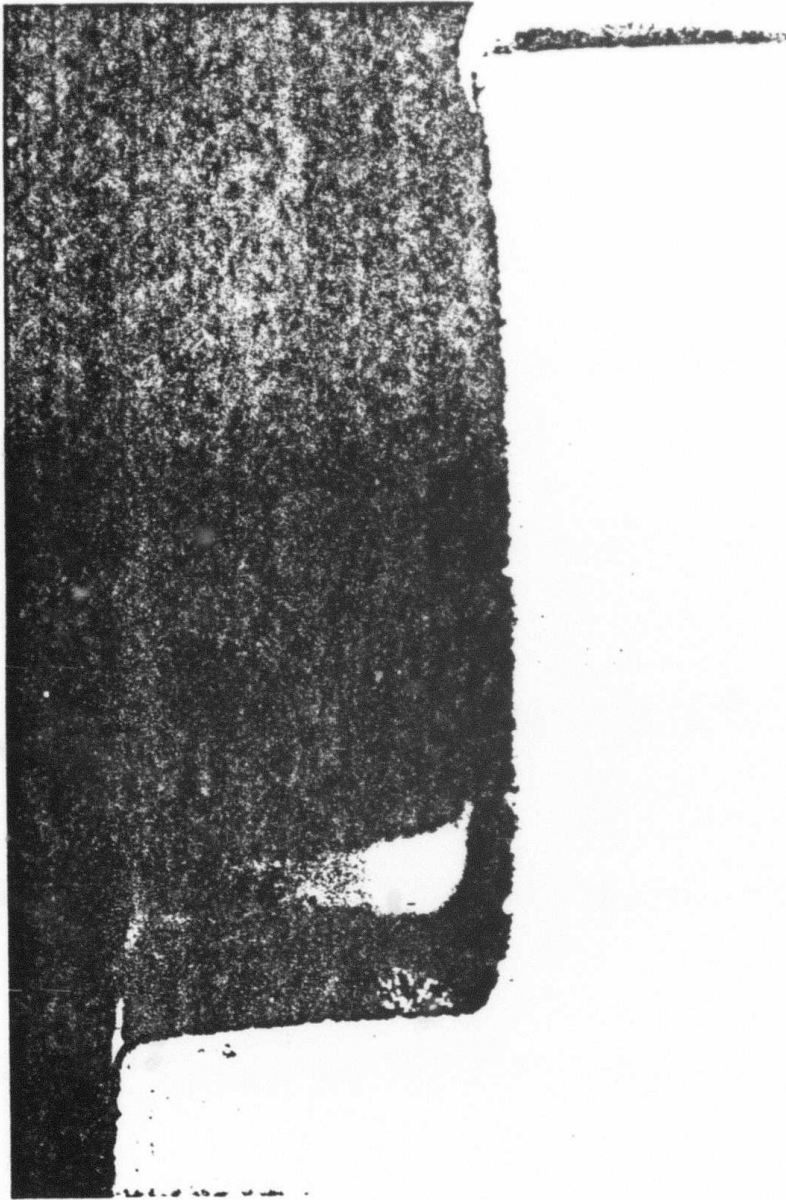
STEP MACHINED WITH TILTING AND DEFOCUSING
